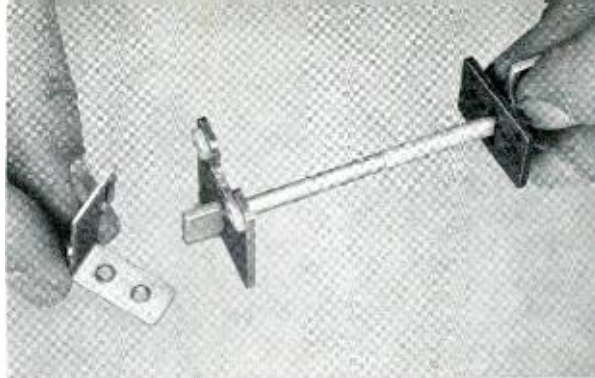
The motion limiting bracket on the left fits over the pole face end of the core, and is subsequently fastened to the cover by means of screws.
